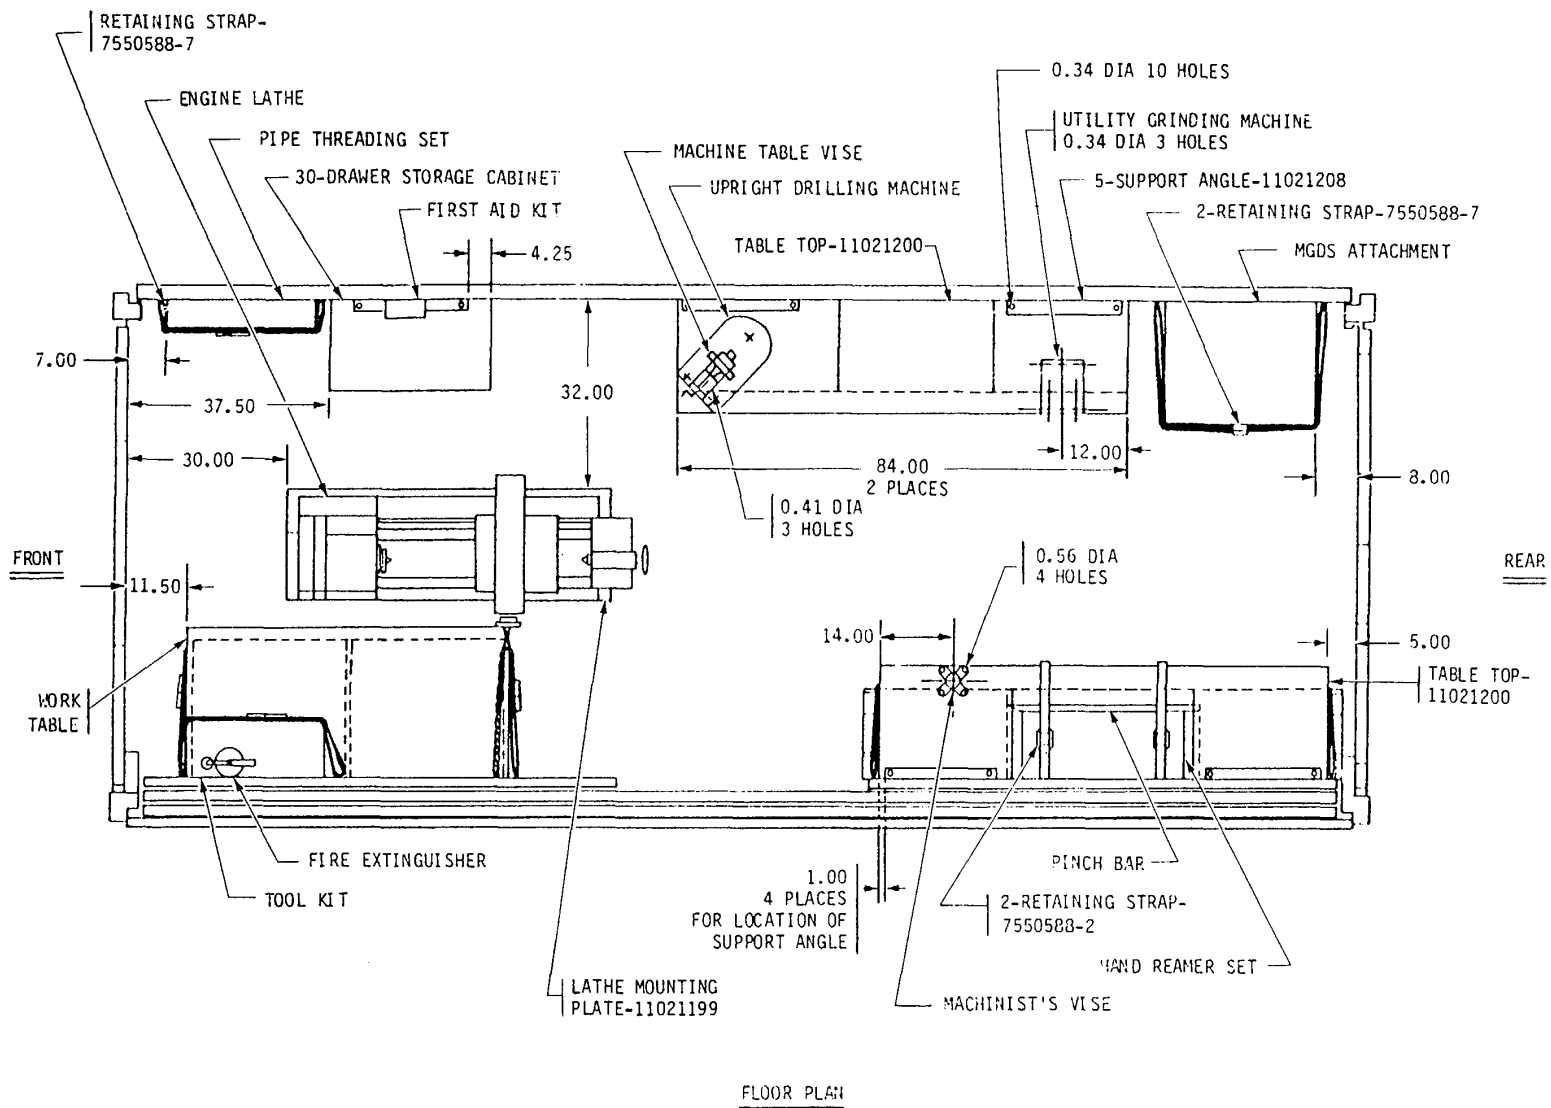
Components to be mounted, unit 2, ISO-2-1, floor plan.
